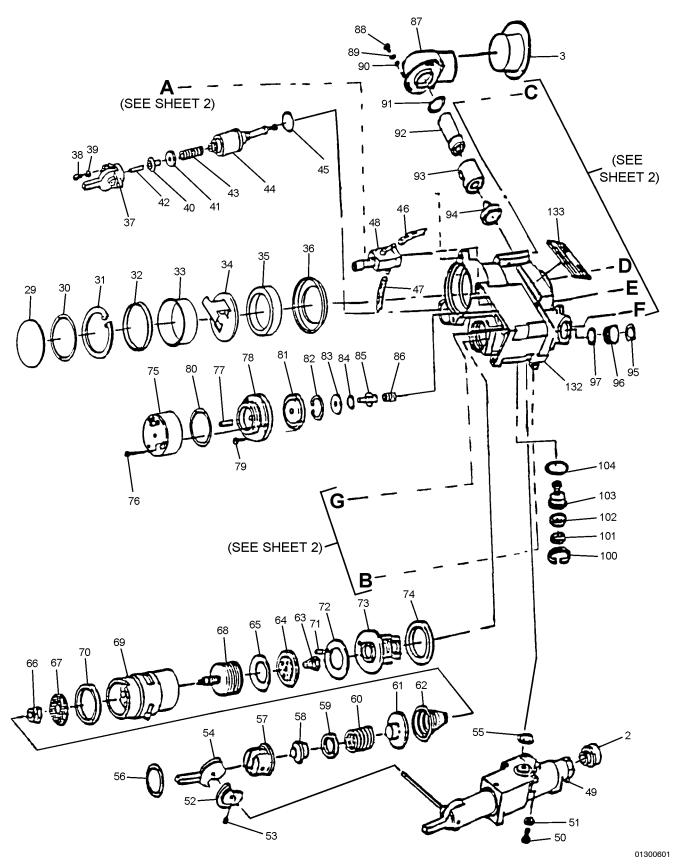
Aircraft Panel Mounted Regulators, 29270 and 3260011 (Sheet 1 of 2)
